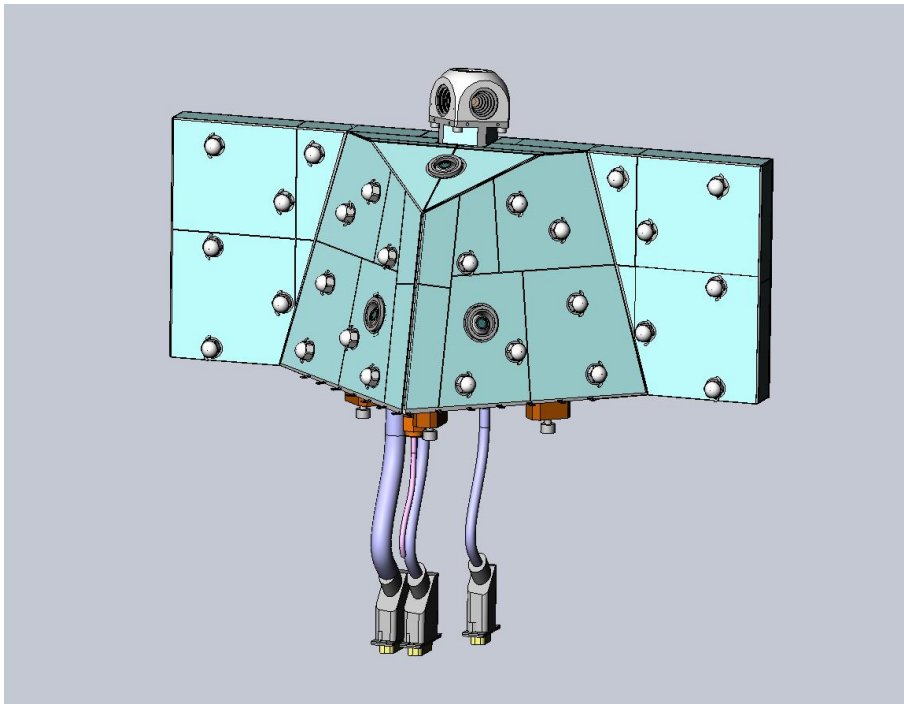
Technical drawing of BepiColombo SIXS instrument. Picture courtesy of OIA.
